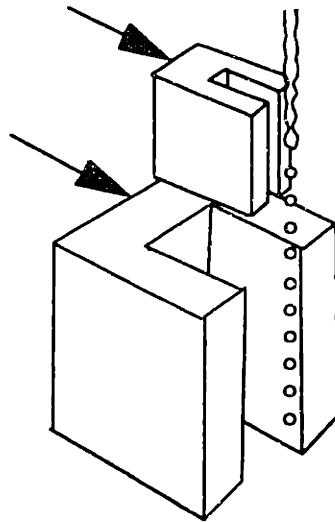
Layout for the original Alpha single jet printhead. Design by D. Brancazio. Electrodes can be removed separately.
